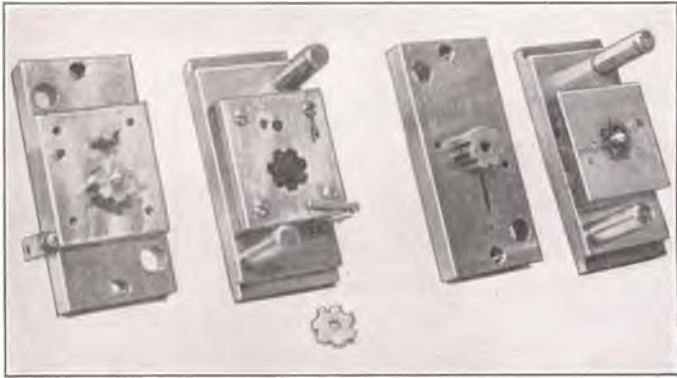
Progressive piercing and blanking tools and a pair of shaving dies
